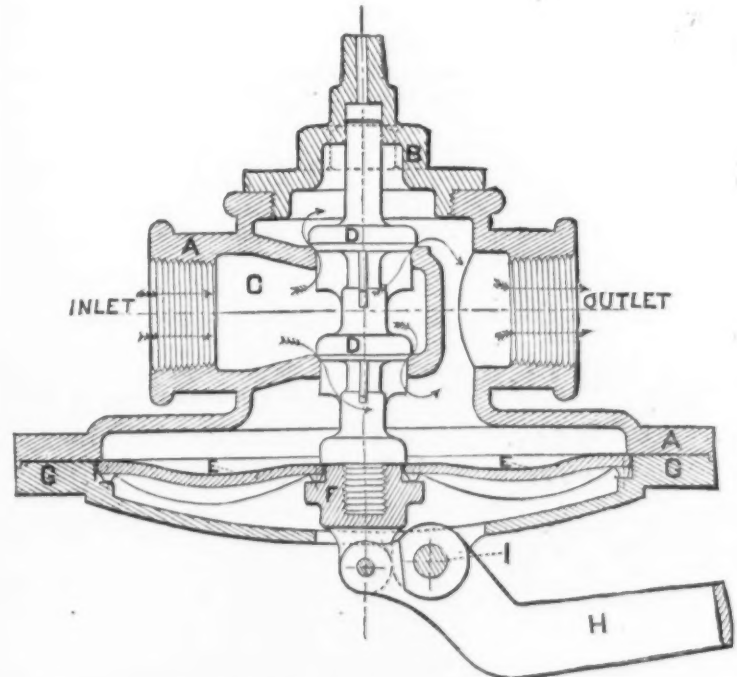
Section through Outlet and Inlet Pipes, showing Lever and the Course of the Steam.
